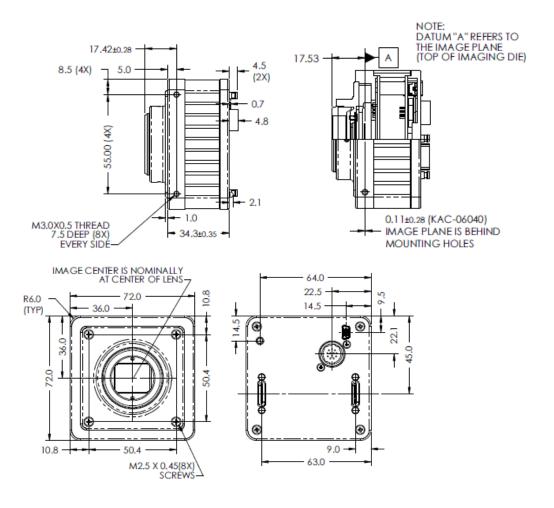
C2880 Mechanical Drawings (C-Mount)
